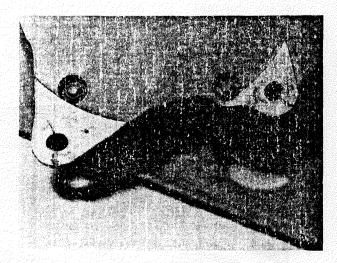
Port aft bulkhead latch gang power drive unit (STS-3)
